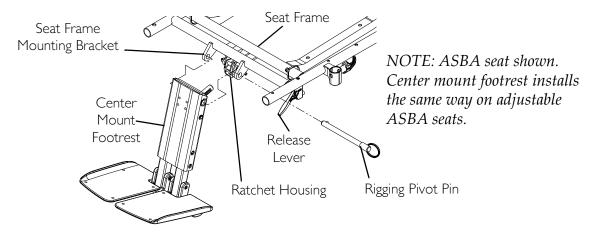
Removing/Installing the Center Mount Footrest
